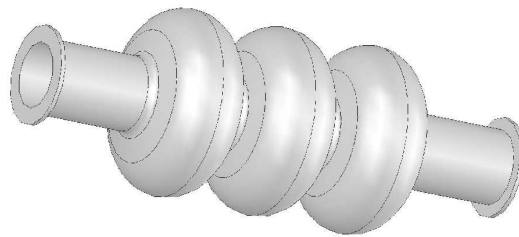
A 3D technical drawing of the niobium 3-cell 1.3GHz cavity
